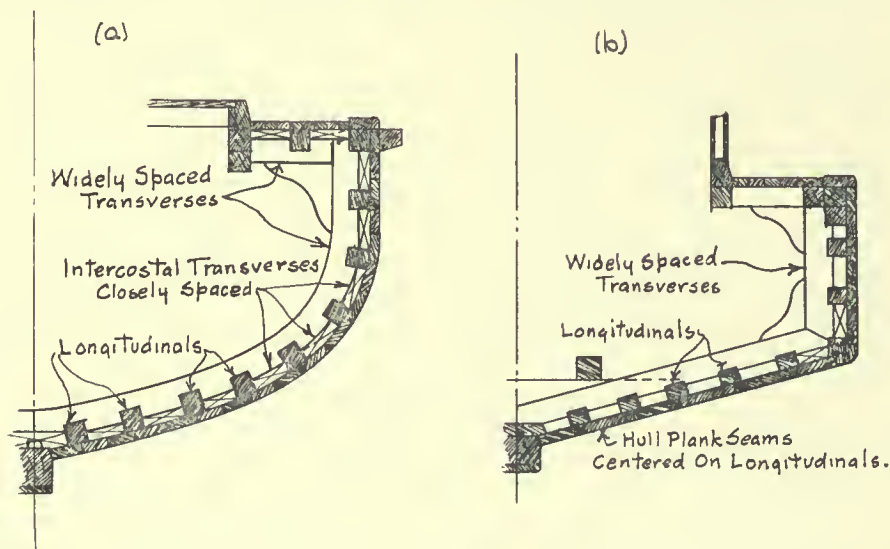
CROSS SECTIONS LONGITUDINAL SHOWING FRAME CONSTRUCTION
